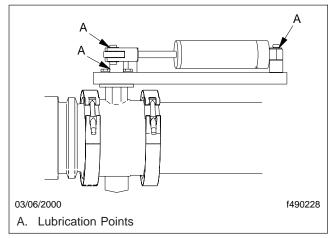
, Pacbrake Exhaust Brake and Air Cylinder
